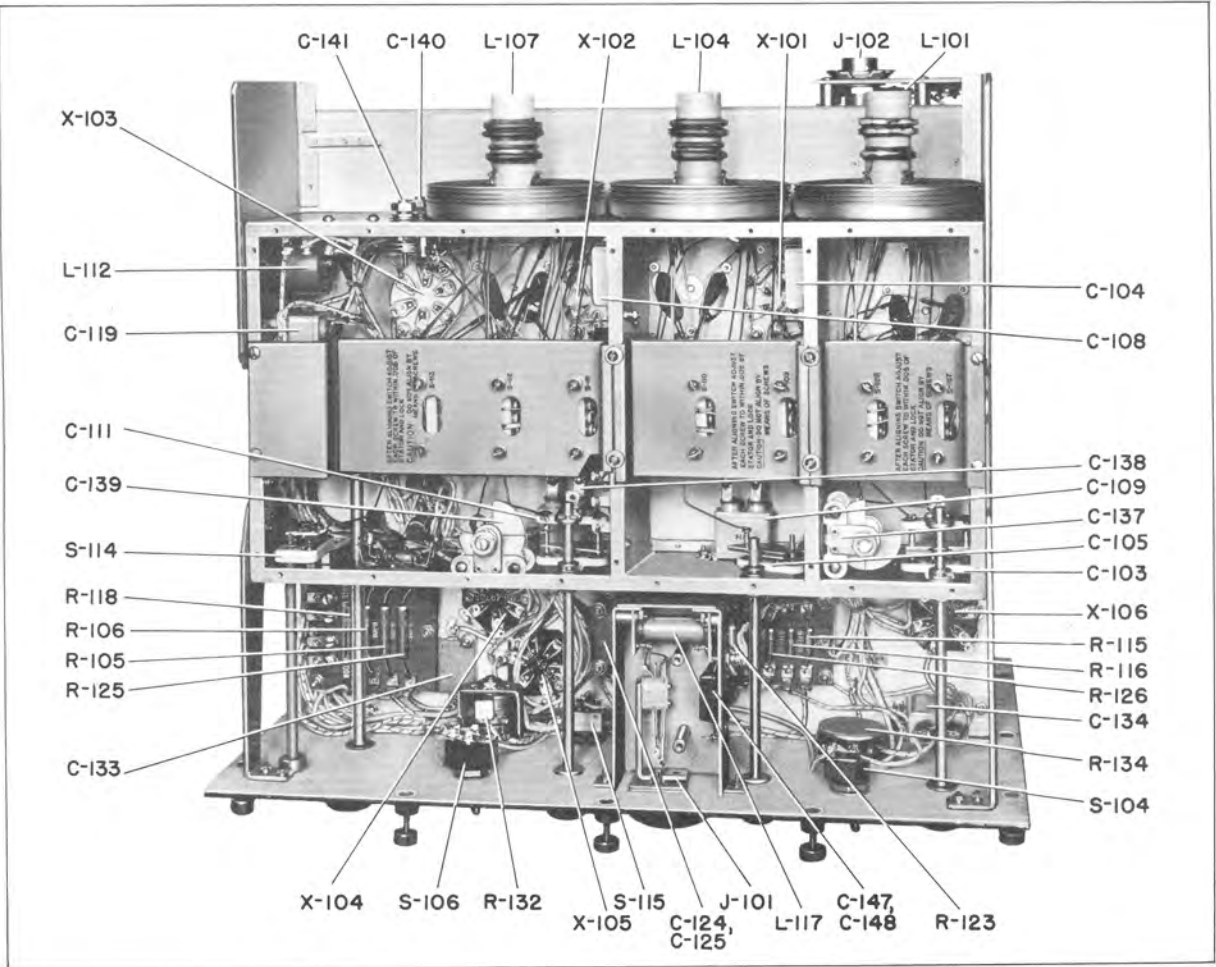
Receiver Unit CMX-46156-A (Bottom View of Chassis—Covers Removed)
